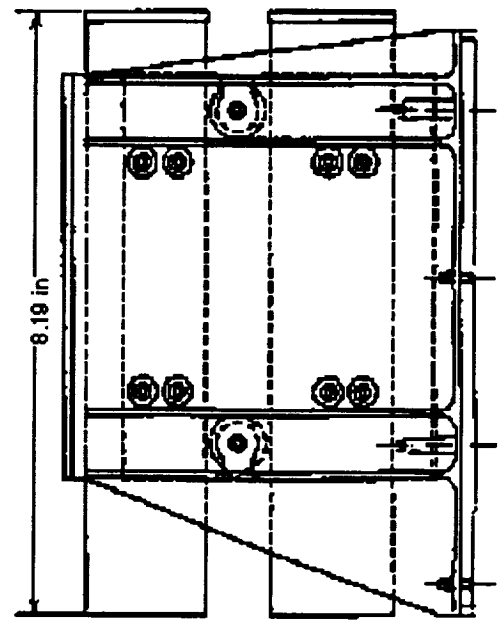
Space Acceleration Measurement System II Tape Drive Assembly Drawing
